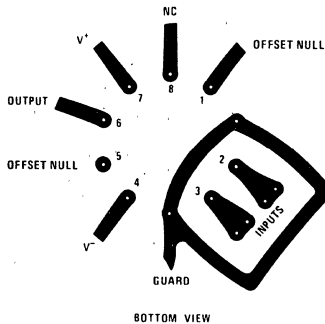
Printed Circuit Layout for Input Guarding with TO-5 Package
